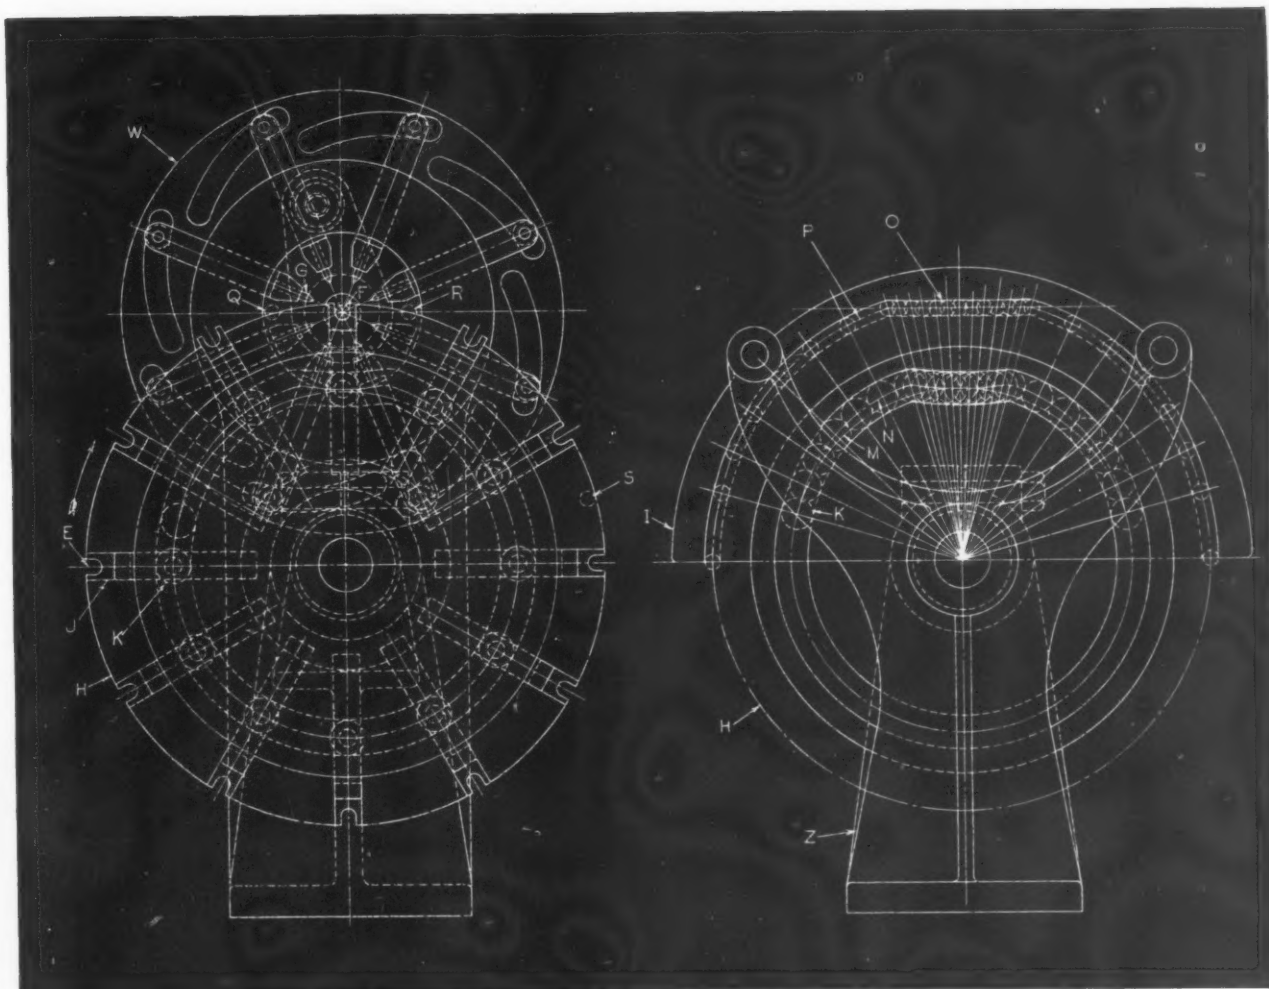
(Left) End View of Indenting Punch and Dial Feed Shown in Fig. 1
